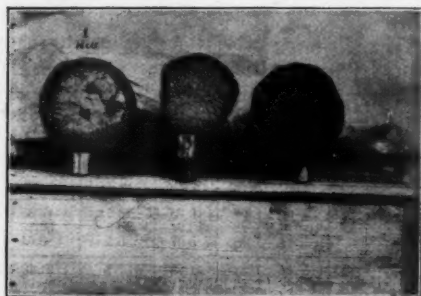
GUN METAL RUNNER HEADS IN ORDER OF CASTING.
